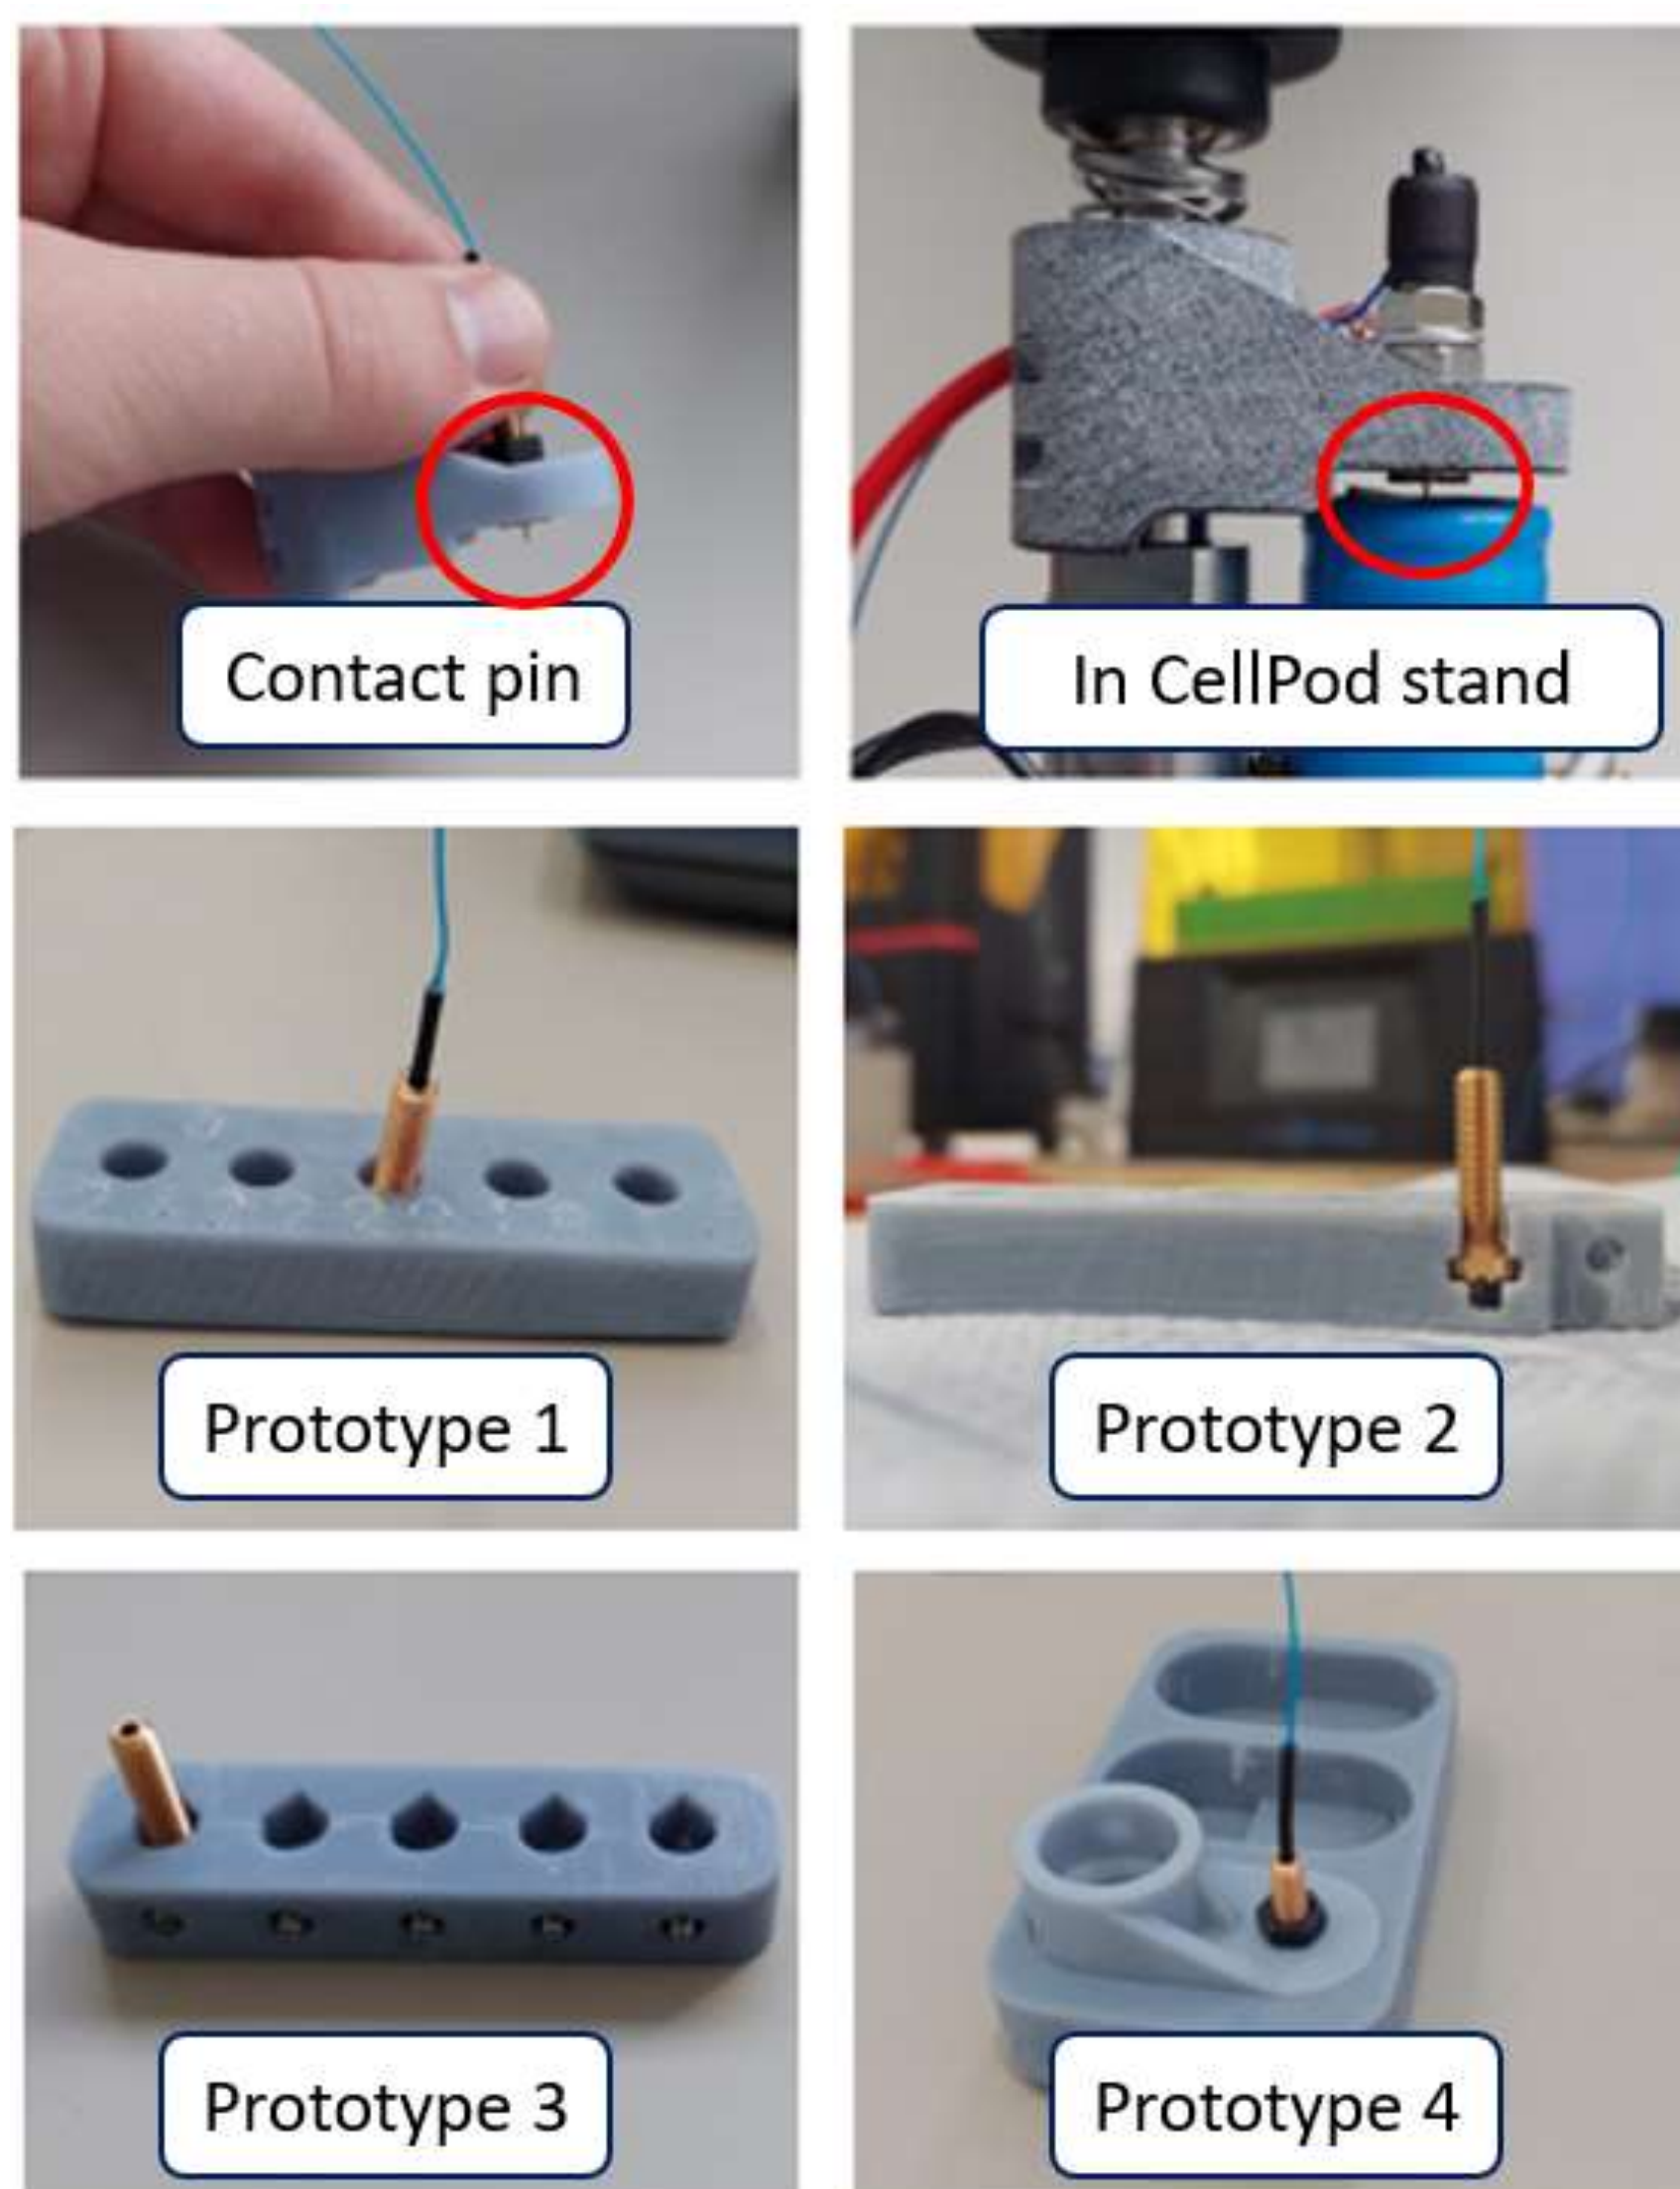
Top row: the contact pin and how it fits into the CellPod assembly. Bottom two rows: Prototypes and final design of sensing pin jig.
